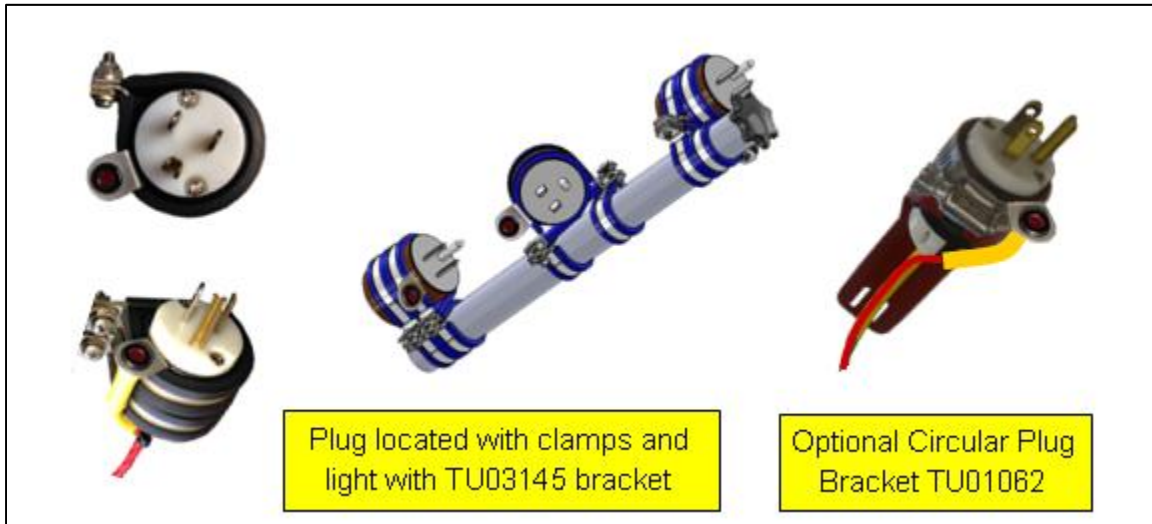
Example of locating options for circular shore plug. Clamps referenced in Table 2.
